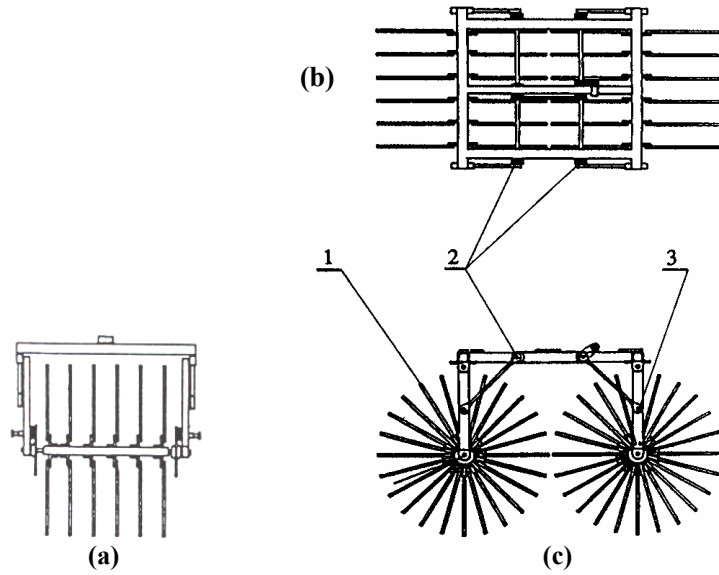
Shaking mechanism, (a) front view, (b) top view, (c) side view (U.S. Patent #4,860,529).
